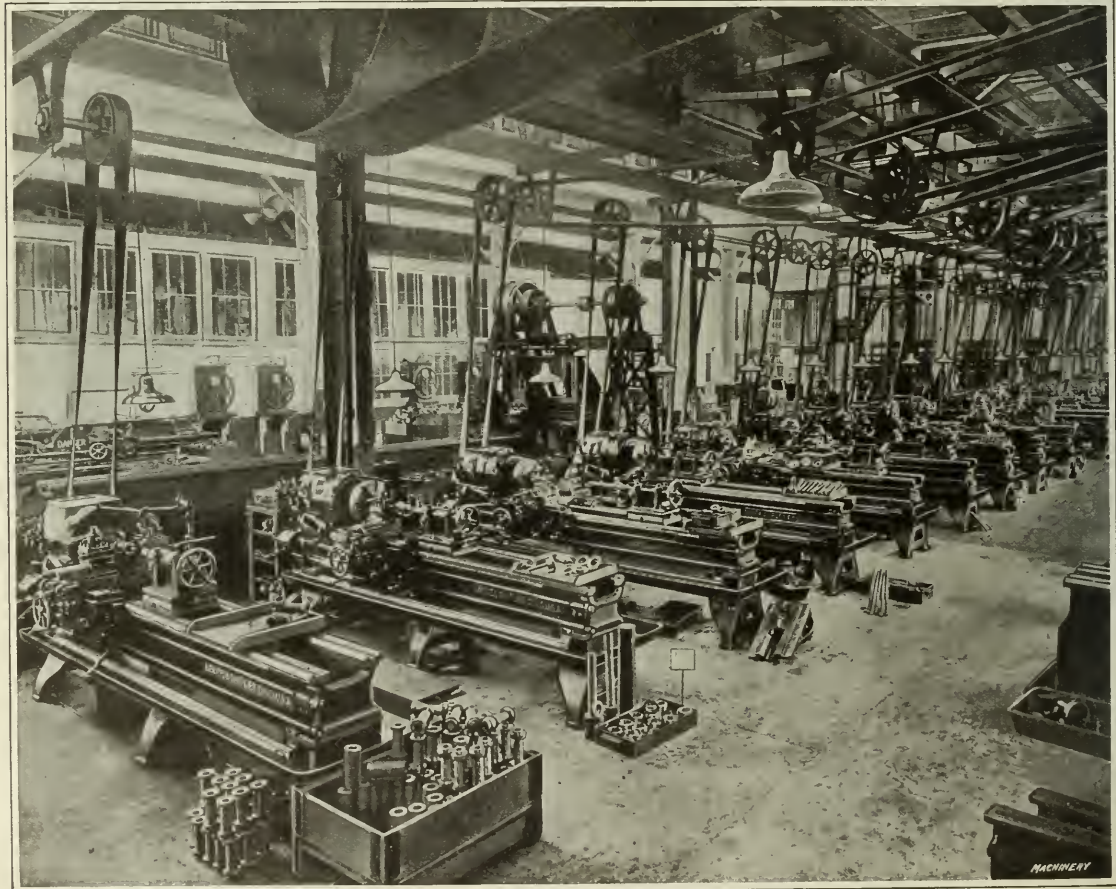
Battery of 18-inch Selective-head Manufacturing Lathes
